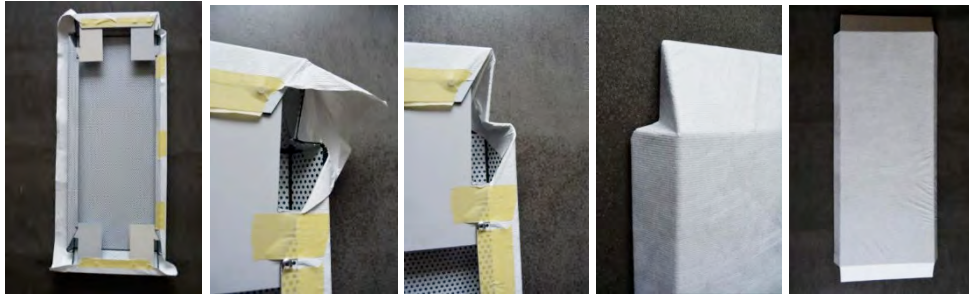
Covering the prototype with PE fleece, with details of the inward fold of the foil at the inner corner (bottom). The bonding surfaces/foil edges have been moved inwards.
